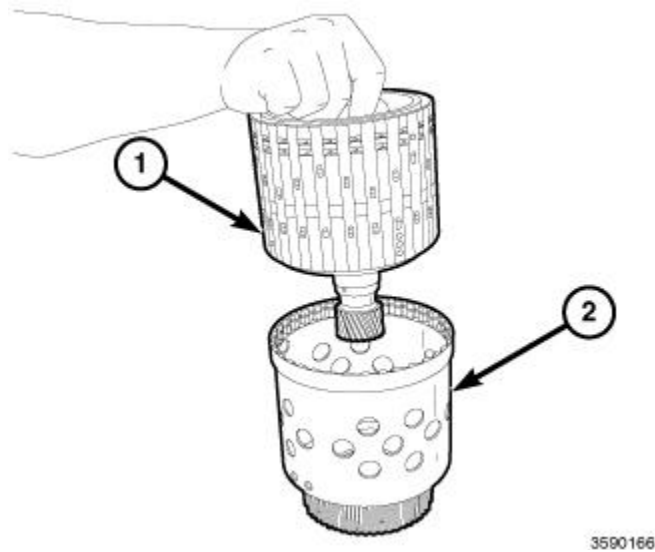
P4 Sun Gear/C/E Clutch Retainer & D-Clutch Drum
